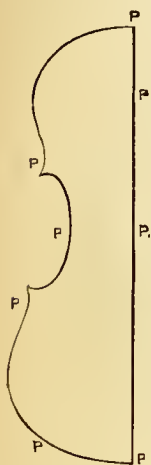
HALF OUTLINE OF MOULD WITH BLOCKS.
